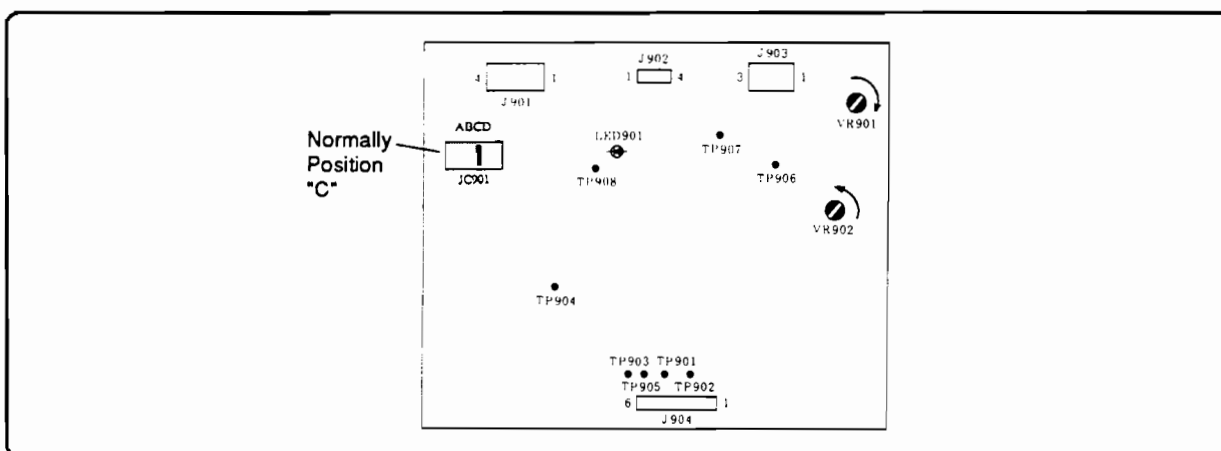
VR901 & VR902 (Laser Driver PCA)
